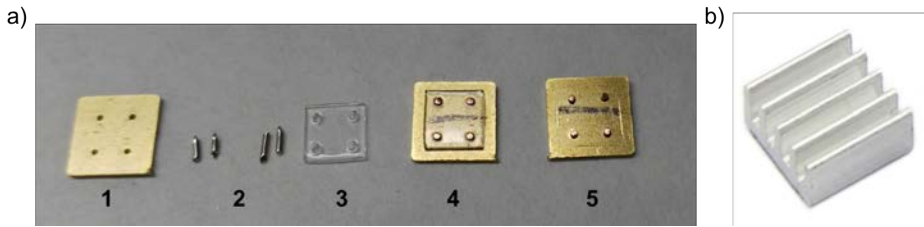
a) Steps of the fabrication of heat sink adapter. Brass piece (1), Cu wires (2), PMMA stencil (3), brass/wires/PMMA just after polishing the wires (4), final heat sink adapter (5). b) Aluminum mini heat sink.
